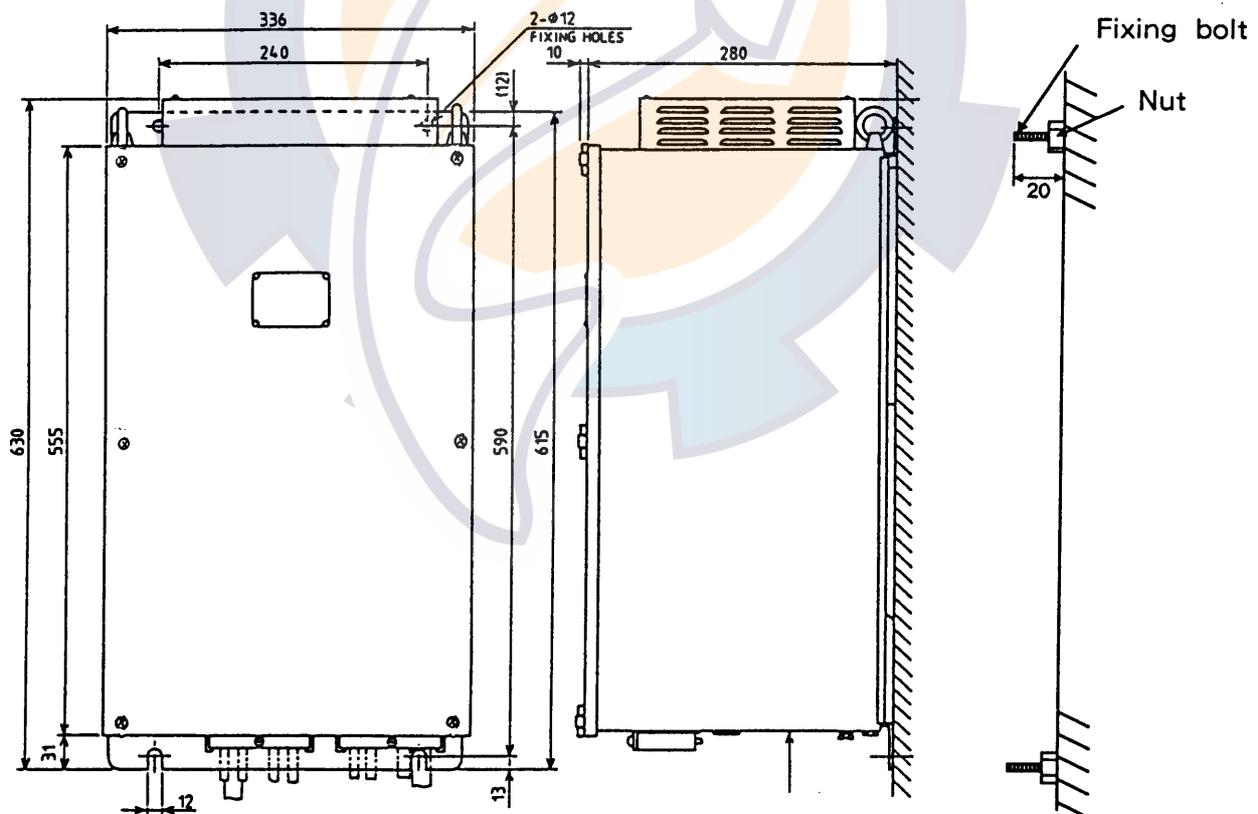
Transceiver Unit Mounting Dimensions (Vertical Mounting)
